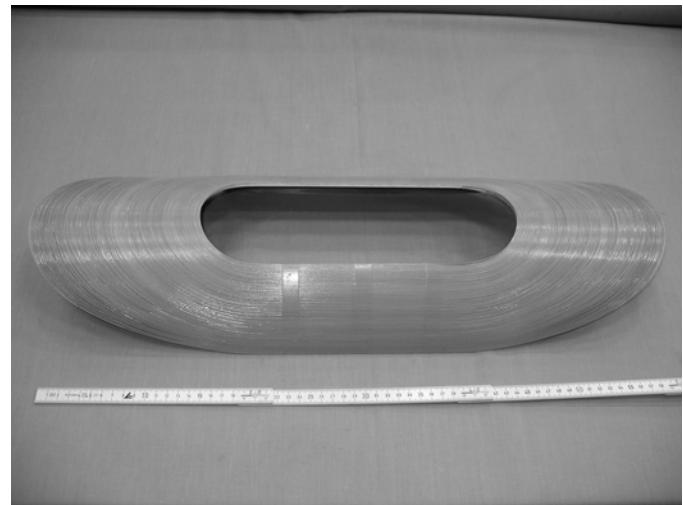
Saddle coil after impregnation, removed from the former, still without current leads. The ruler is marked in cm.
